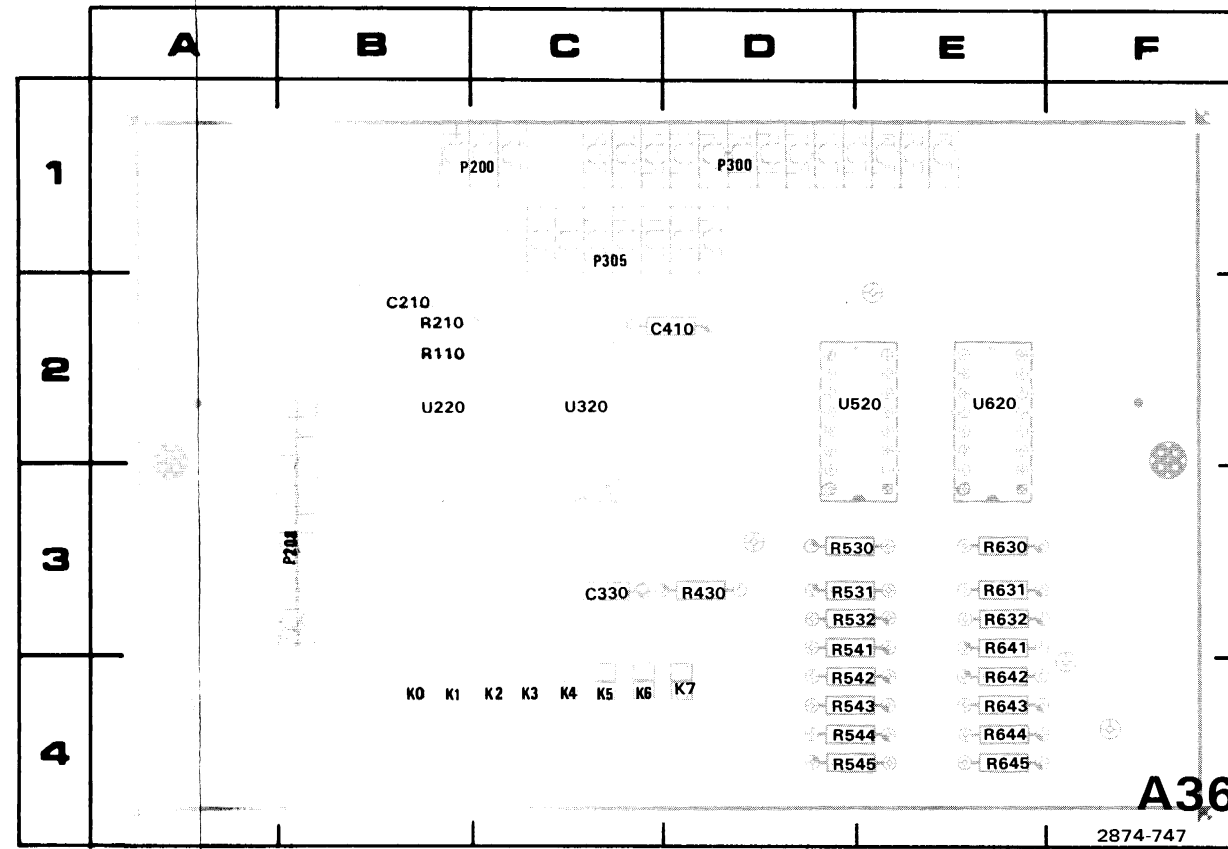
A36—Calculator Keyboard circuit board assembly.
